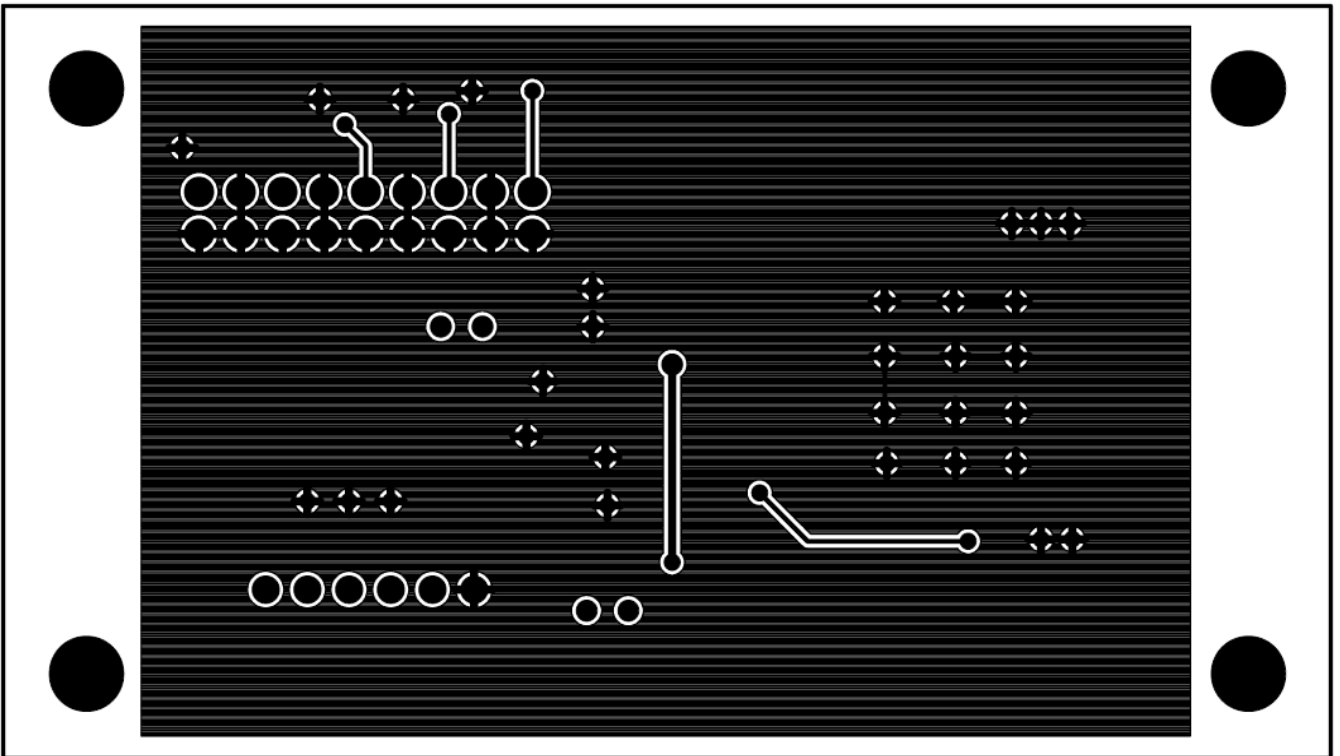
MAIN BOARD BOTTOM LAYER ROUTING
